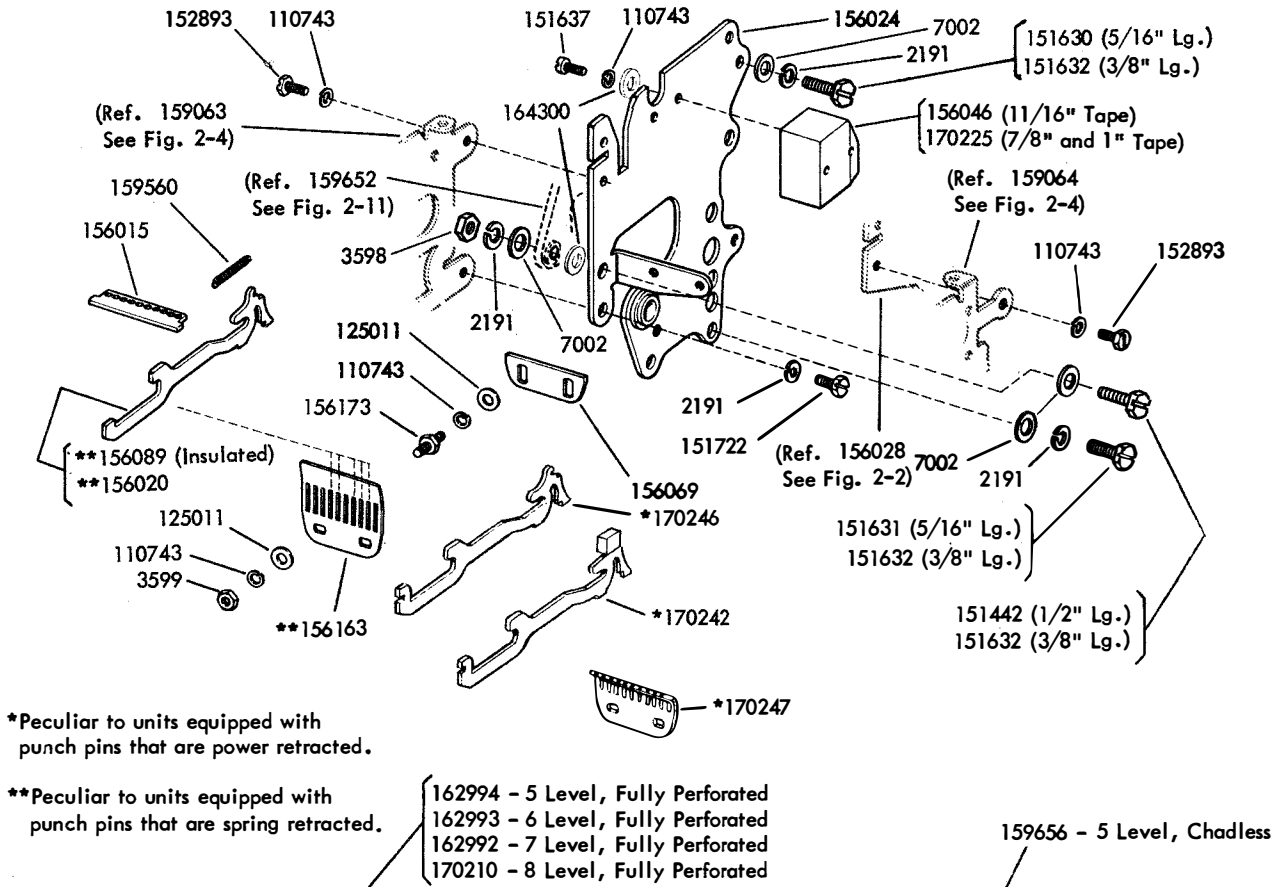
REAR PLATE AND PUNCH BLOCK ASSEMBLIES
